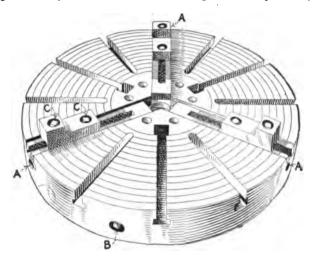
THREE-JAW CHUCK FOR BORING MILL
